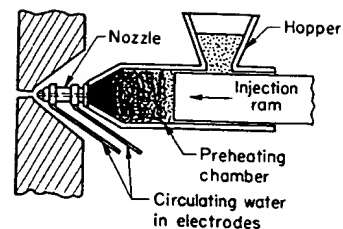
Jet molding process for injection-molding thermosetting plastics.
